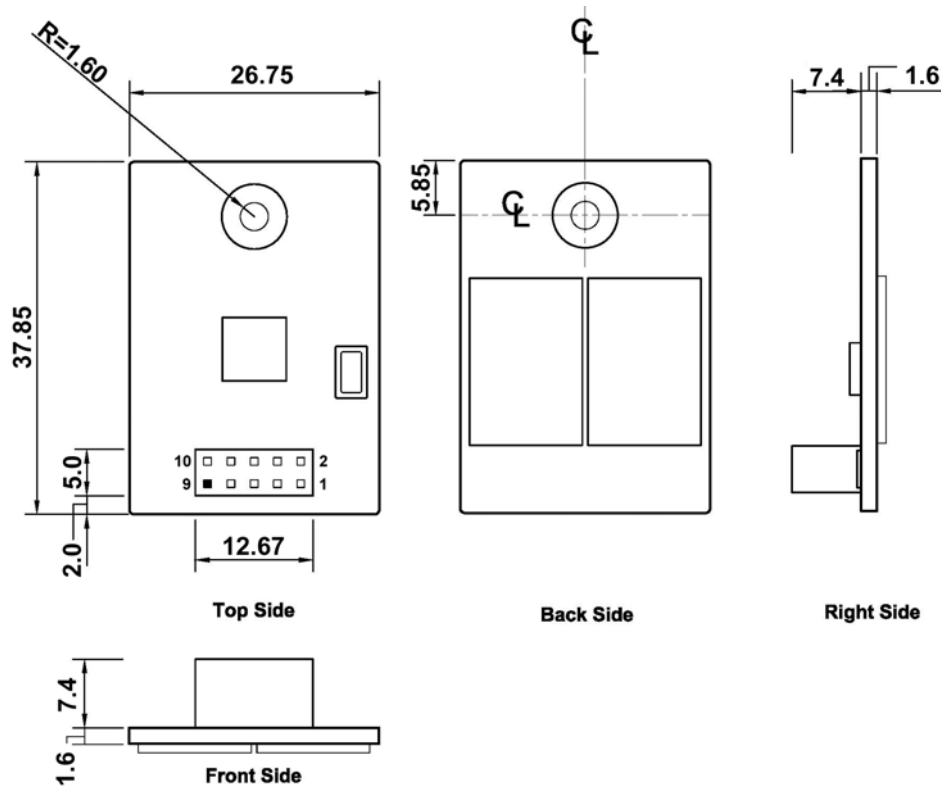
Industrial USB Disk Module Horizontal Type – Standard Form factor Dimension
